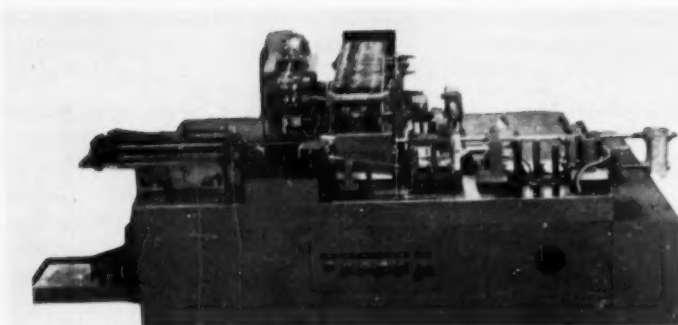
50-Kw. Vacuum-Tube Equipment, Heating ½-In. Stainless Steel Bars for Second Forging Operation. Production: 15 sec. per piece. Courtesy Induction Heating Corp.
